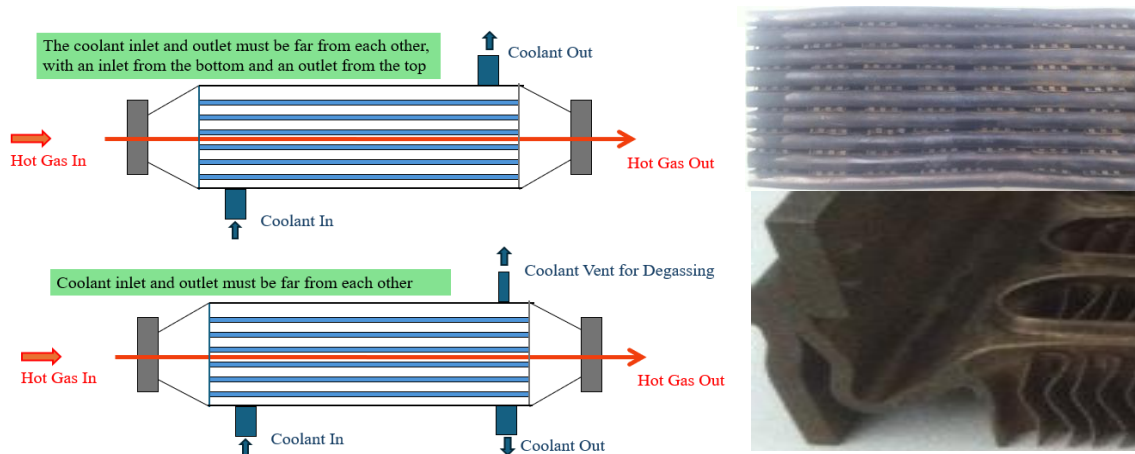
EGR cooler coolant location to avoid boiling & boiling failure.
